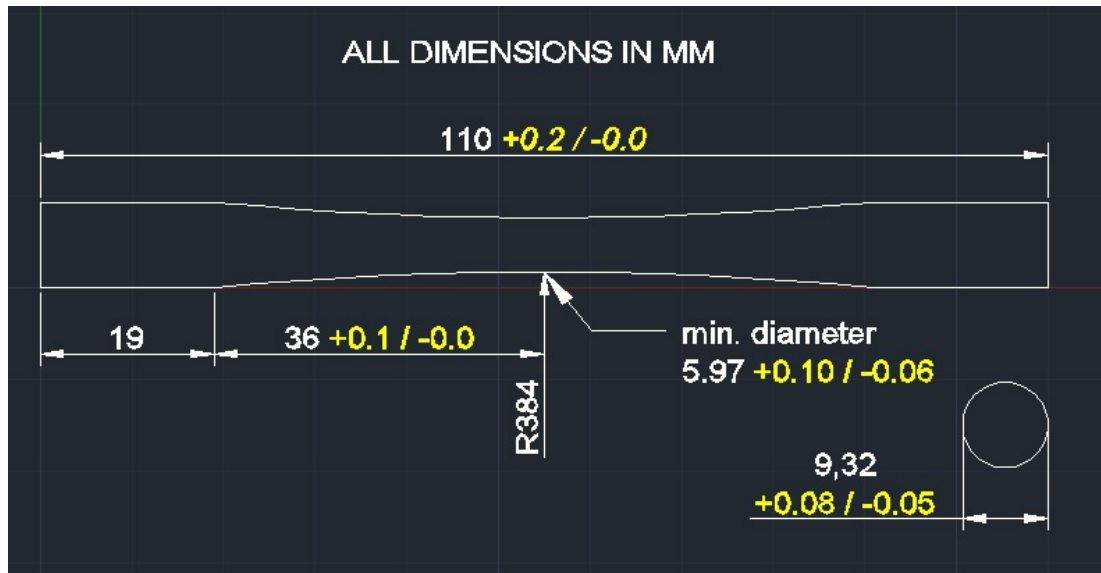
Continuous radius fatigue specimen dimensions - Dimensions requested for machined specimens, illustrating also required tolerance values.
